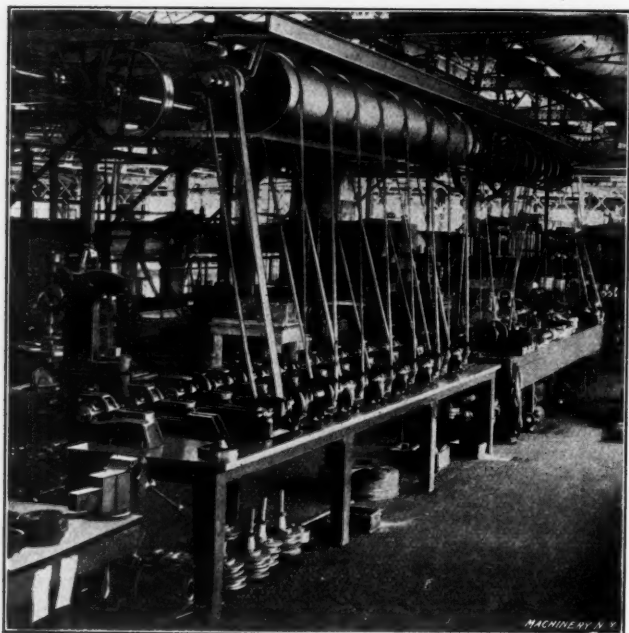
"Running in" Wheel Spindles prior to Assembling
